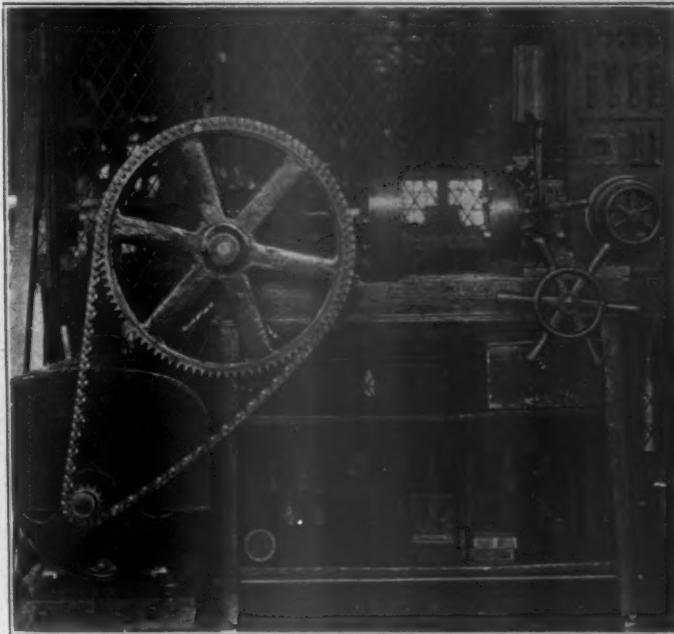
MOTOR DRIVE APPLIED TO SAUNDERS IXL PIPE CUTTER.
